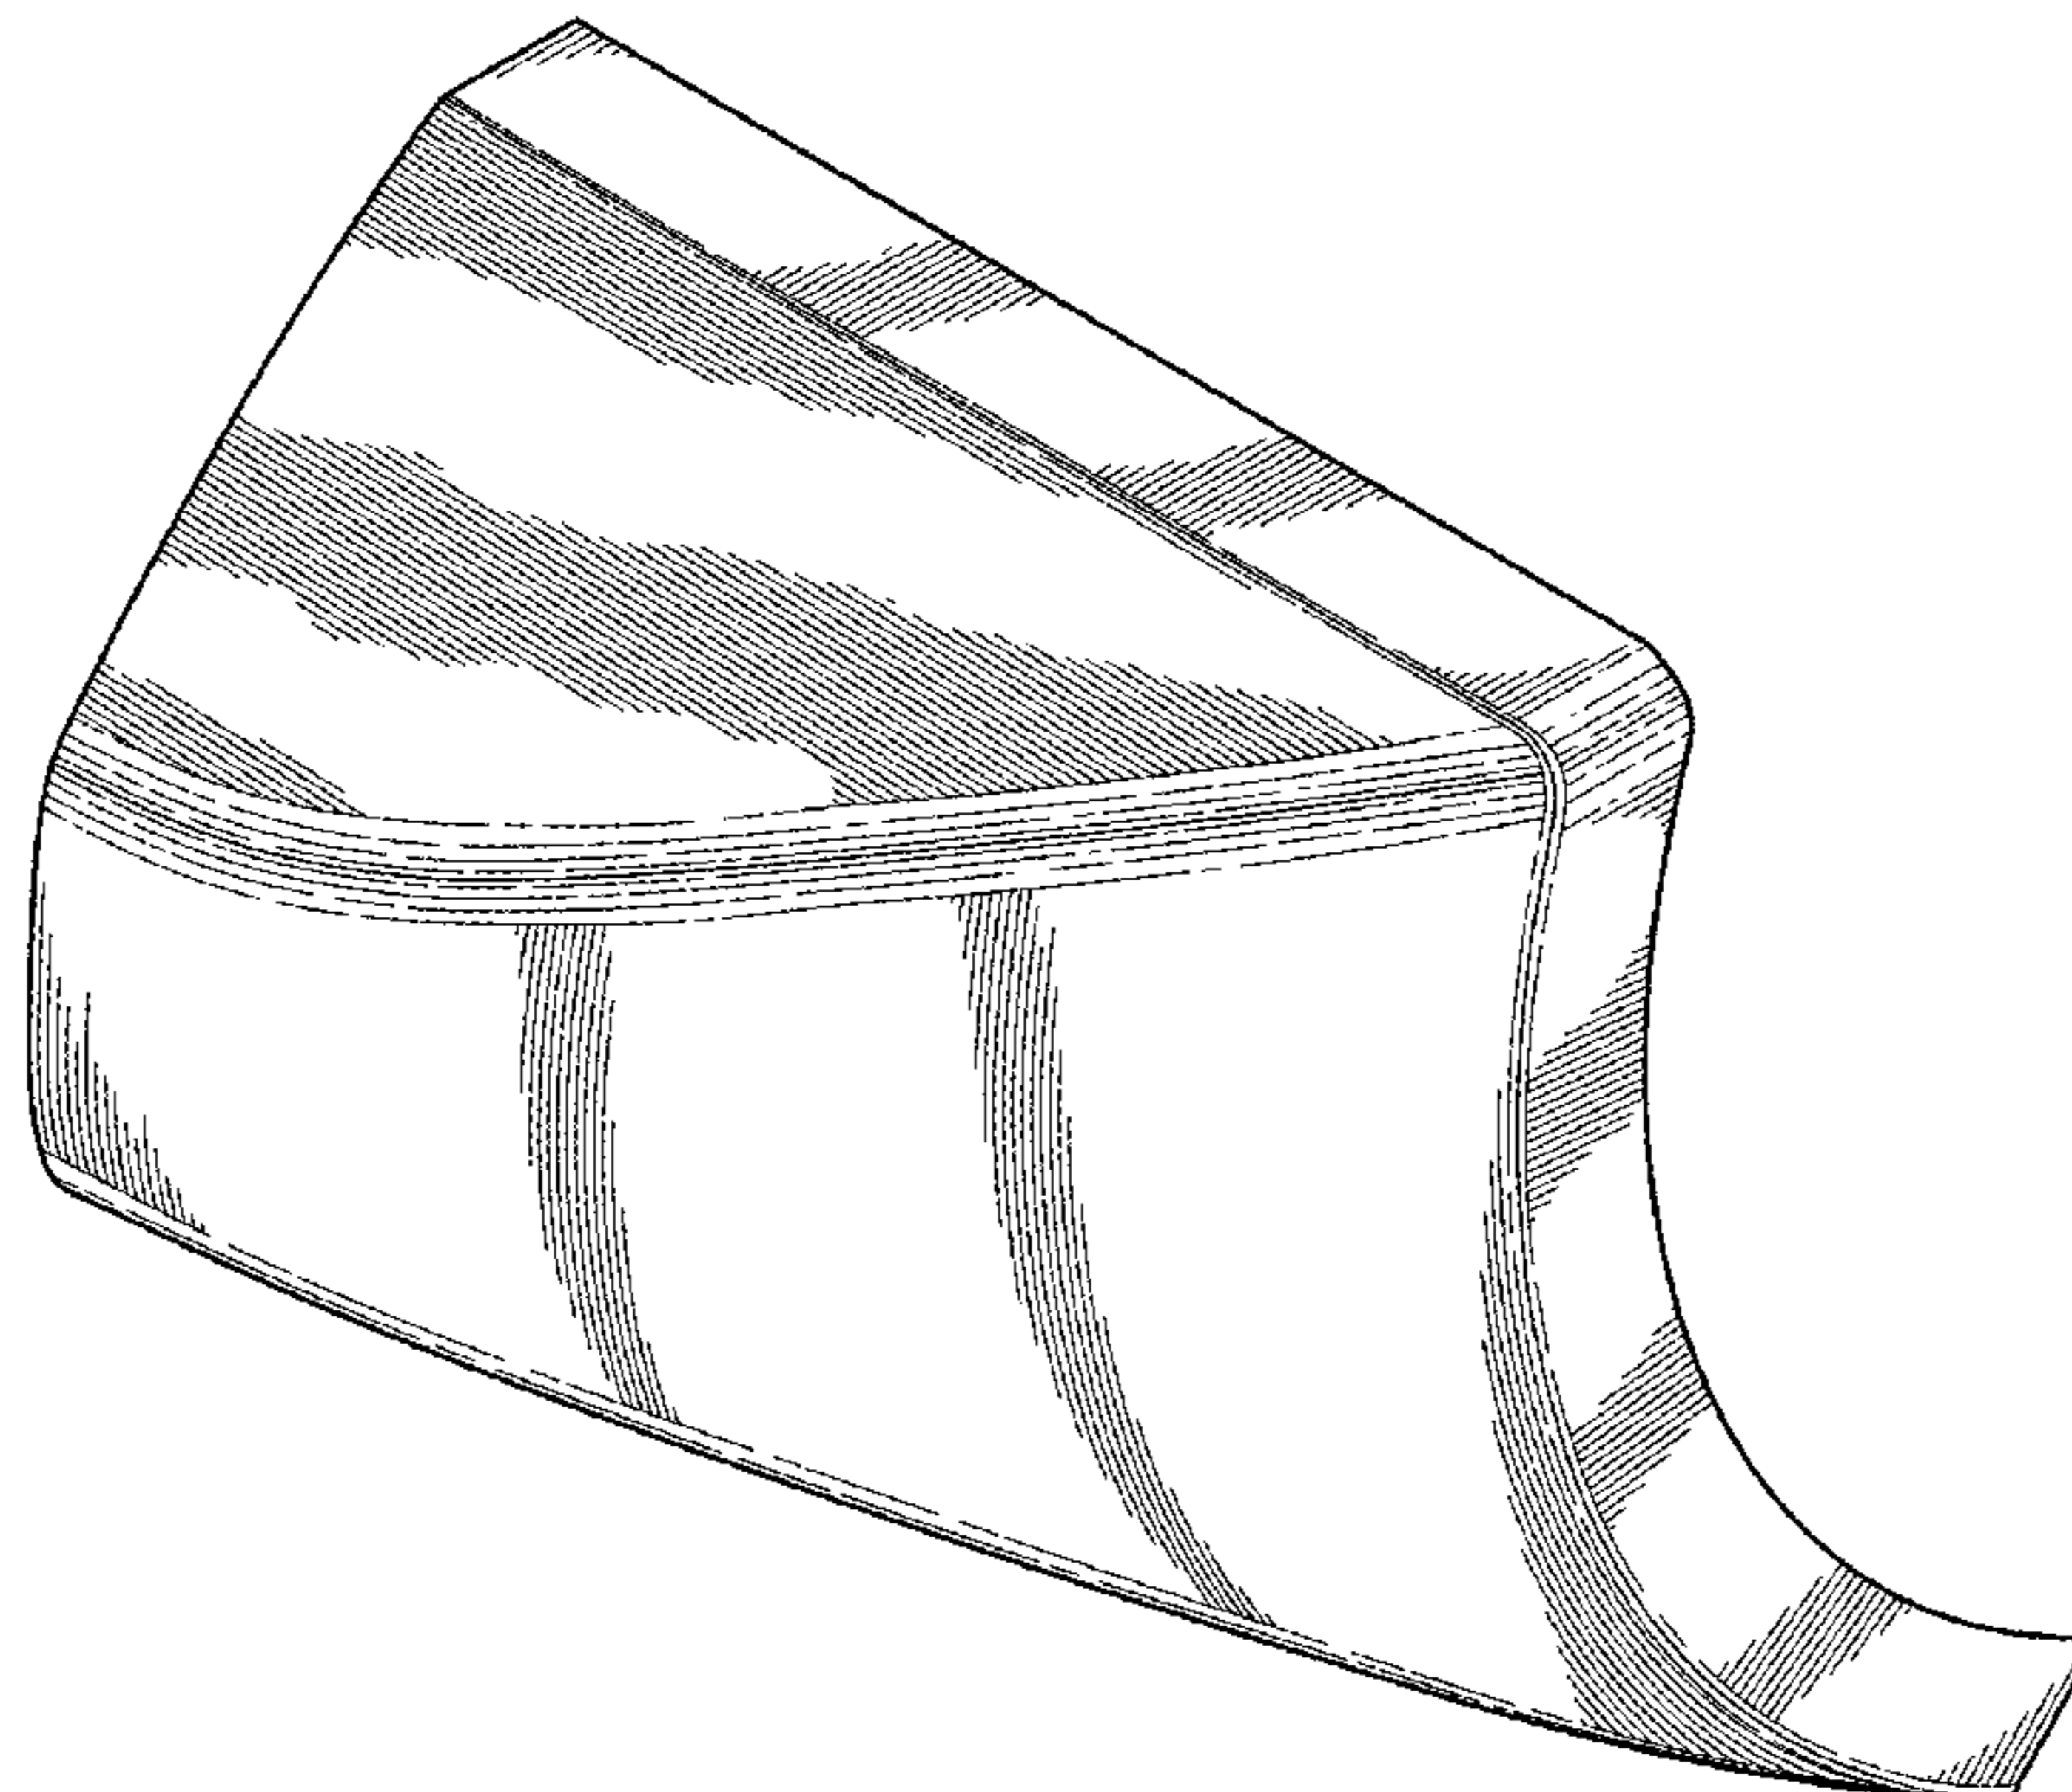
is a top view of a fender fairing shown in FIG. 7;
